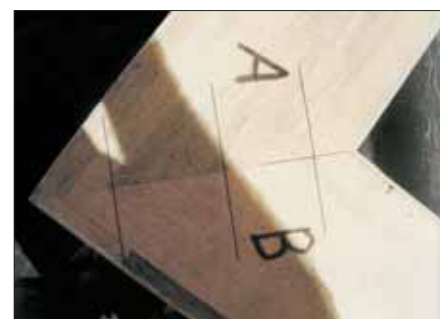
A sample of a 6" wide moulding with markings made, ready for cutting
